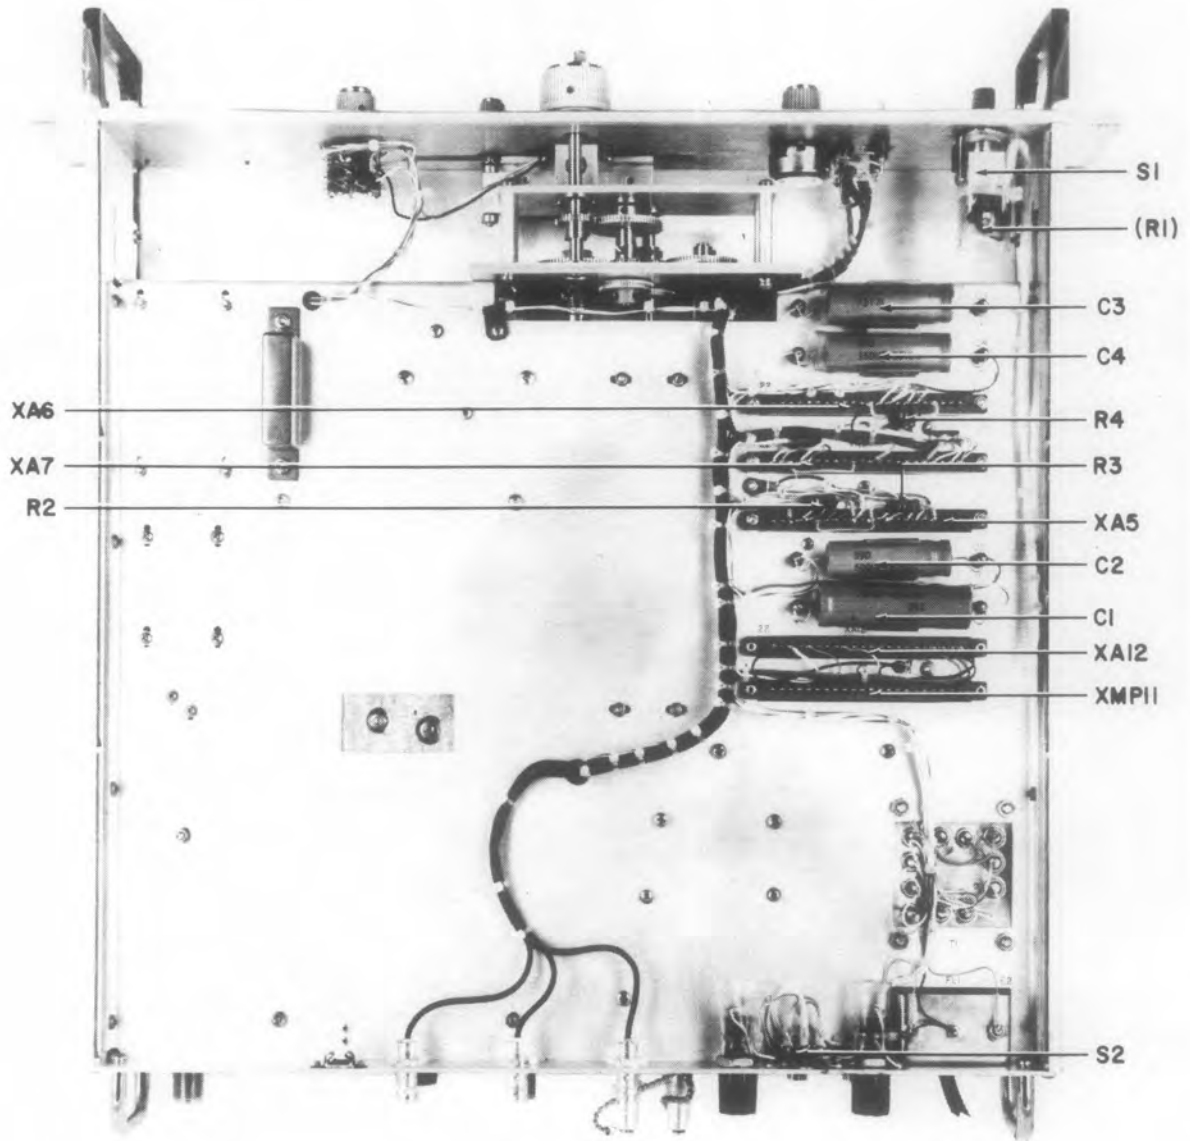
Type WJ-9080A Tuner, Bottom View, Location of Components
